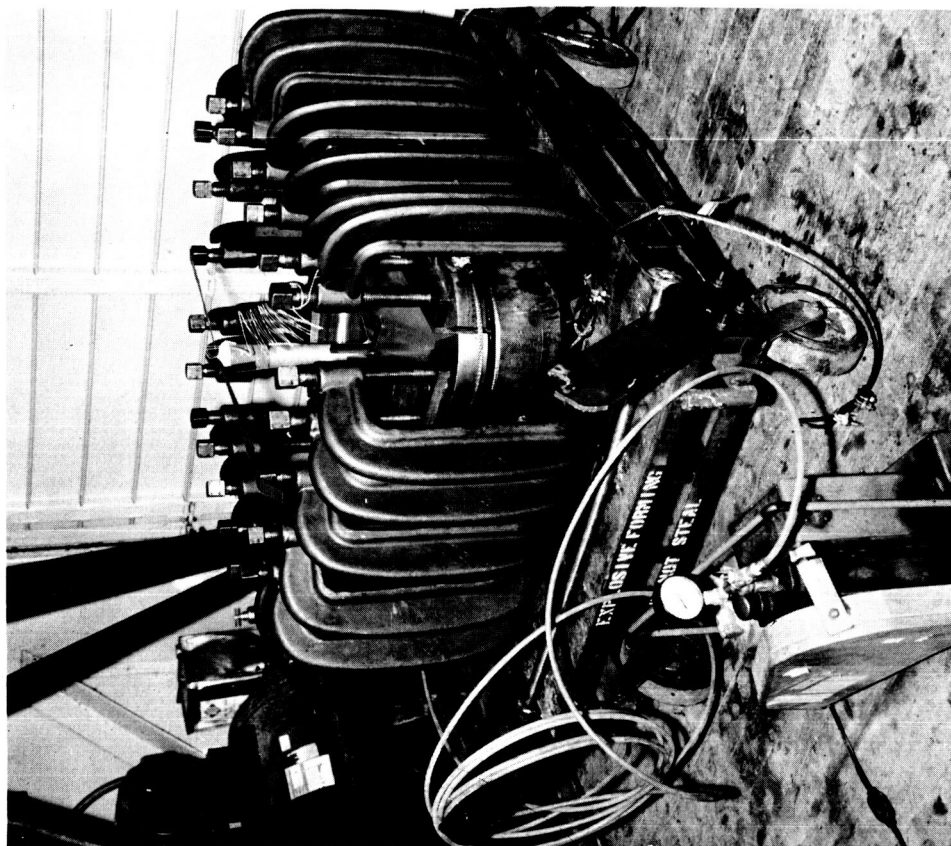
Central Charge Placement for Explosive Forming of Thin Gage Alloys
